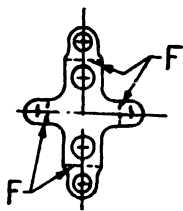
A type of blank for which several different scrap-strip designs can be made.
